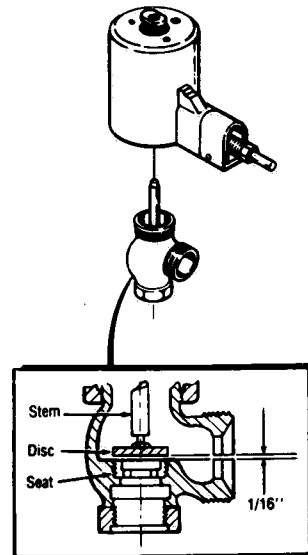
HI-LO VALVE ADJUSTMENT.
